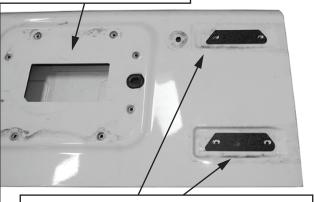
Remove rubber bumper (arrow). Rear door pictured with vent removed. DO NOT remove vent
